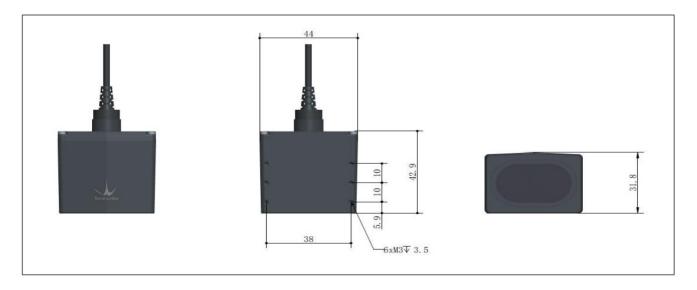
TF03-180 dimensions (Left 1: top view; Left 2: upward view; Left 3: front view) Unit: mm
